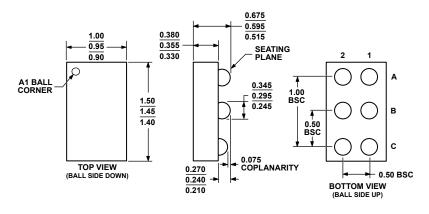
6-Ball Wafer Level Chip Scale Package [WLCSP] (CB-6-2) Dimensions shown in millimeters
